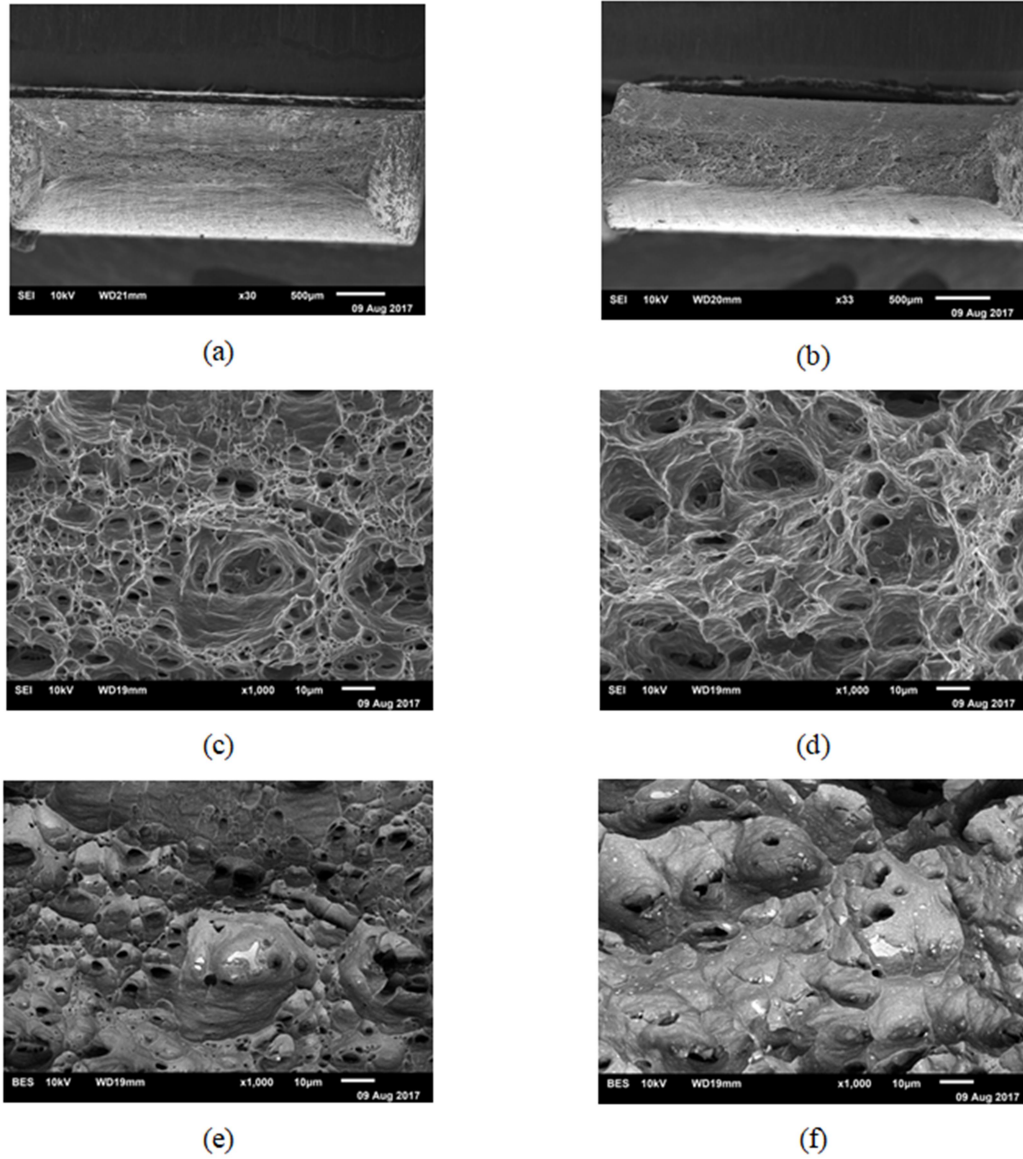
SEM fractographic images of fracture surfaces for AA7075-O uniaxial tension sample tested at 220°C corresponding to test speeds; (a, c and e) 1 mm/min, and (b, d and f) 10 mm/min.
